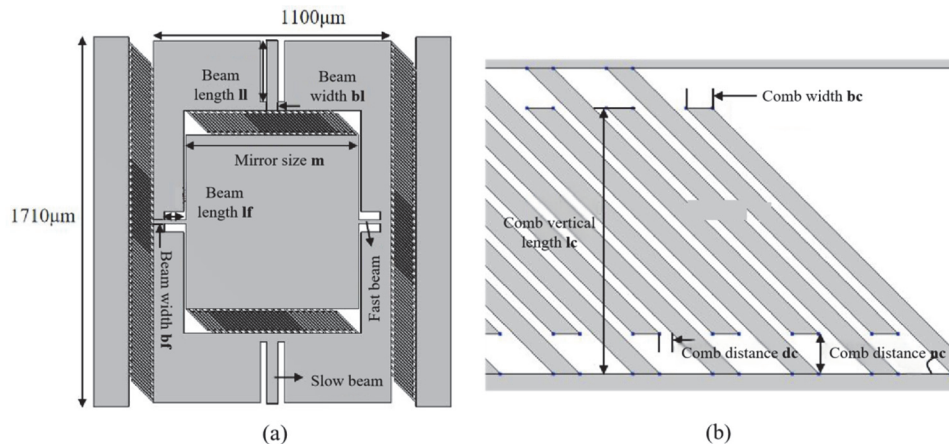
Design of electrostatic helical tooth structure (a) overall structure of oblique comb tooth vibrating mirror; (b) enlarged diagonal comb tooth structure
